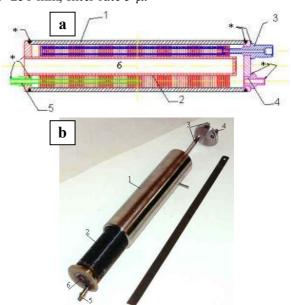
Assembly drawing (a) and the explode view (b) of the MH container: 1 – case, 2 – heat exchanger, 3 – filter with gas input / output fitting, 4 – sleeve for MH loading, 5 – thermocouple shield, 6 – place for electric heater, * – welded joints.
